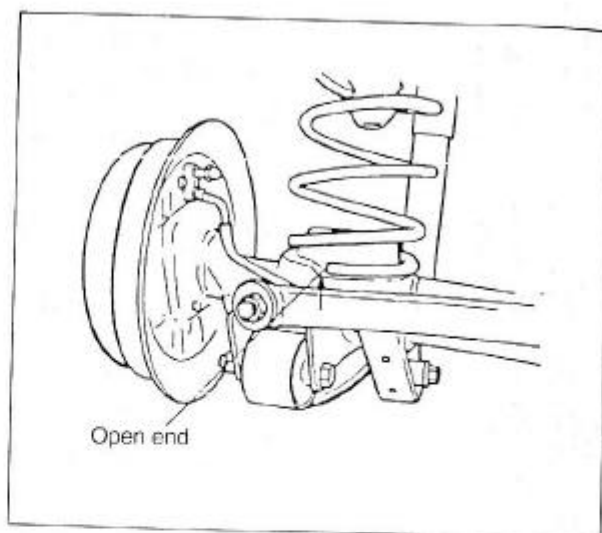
E — 13 INSTALLATION OF COIL SPRING
